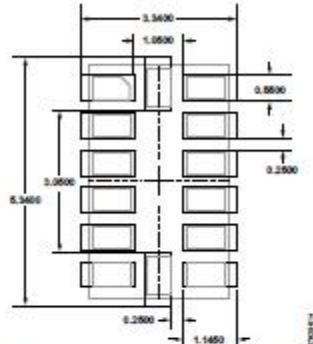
Recommended Printed Wiring Board Land Pattern (Dimensions shown in millimeters)
